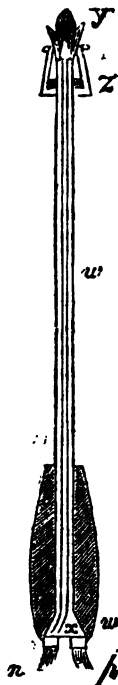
is a soldering tool, to be used where a jet of flame is not available, as in joining zinc. In this arrangement, the hydrogen and air flame heats a piece of copper, *y*, with which the work is performed. *w* is the tool, with a hollow handle and stalk; air being supplied by the pipe *p*, passes through the hollow handle and stalk; *x* is a small tube which passes down the hollow handle and stalk, and conveys gas from the pipe *n* to the extremity of *w*, where it mingles with the issuing air, and, on being ignited, the flame will heat the piece of copper, *y*, (which, of course, may be of the shape of any soldering tool required,) held by the arms, *z*.
